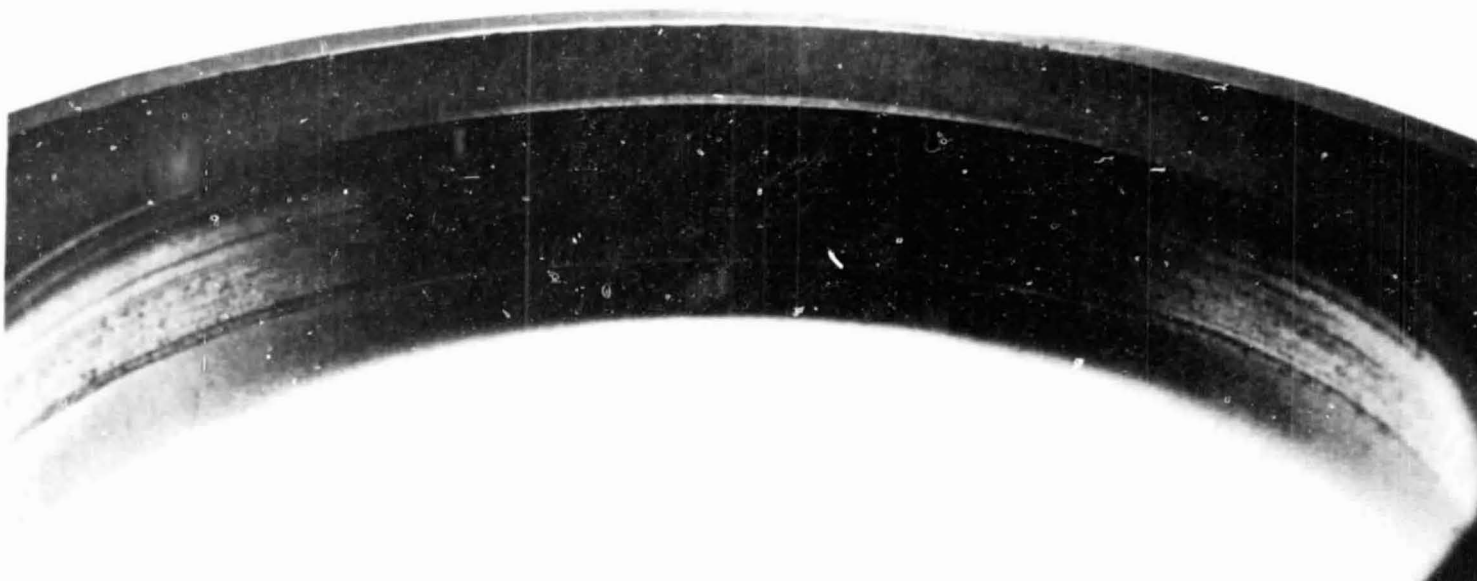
Turbine End Primary Seal Ring, P/N 7R0011525, S/N 047901,
